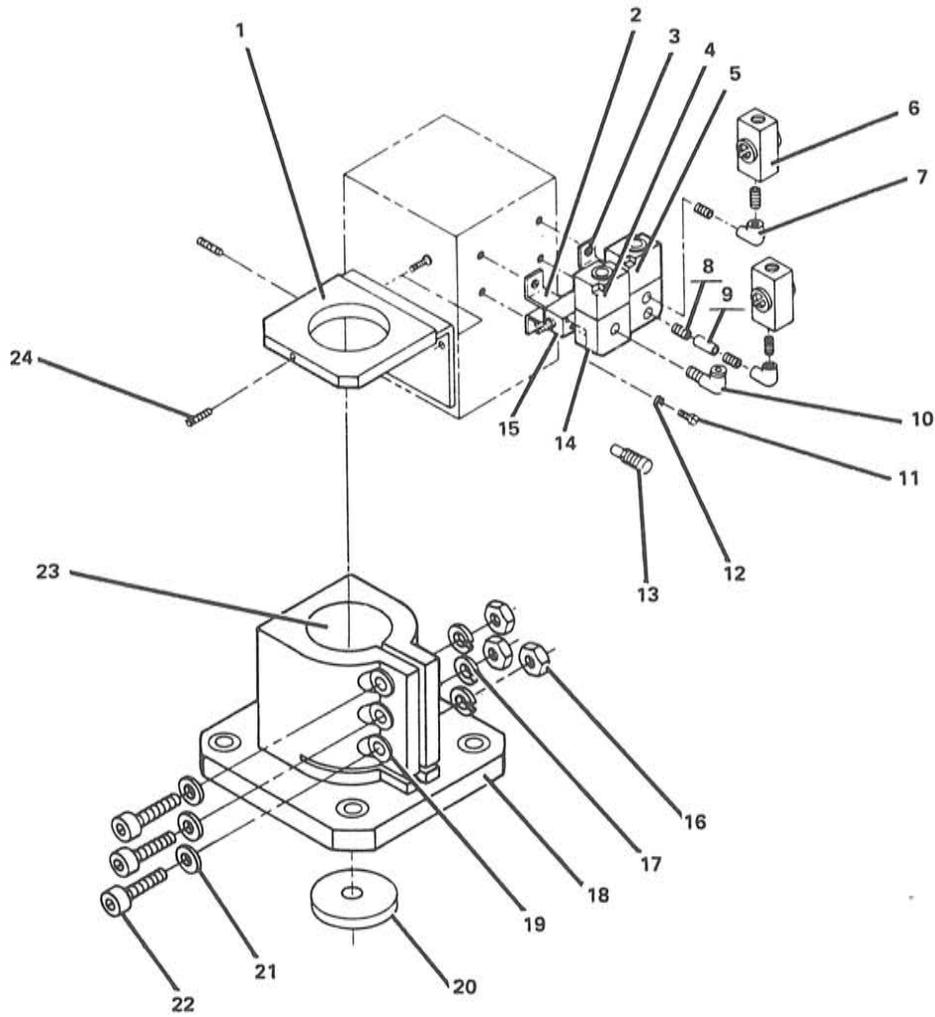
BASE ASSEMBLY. SEE LIST 5.
